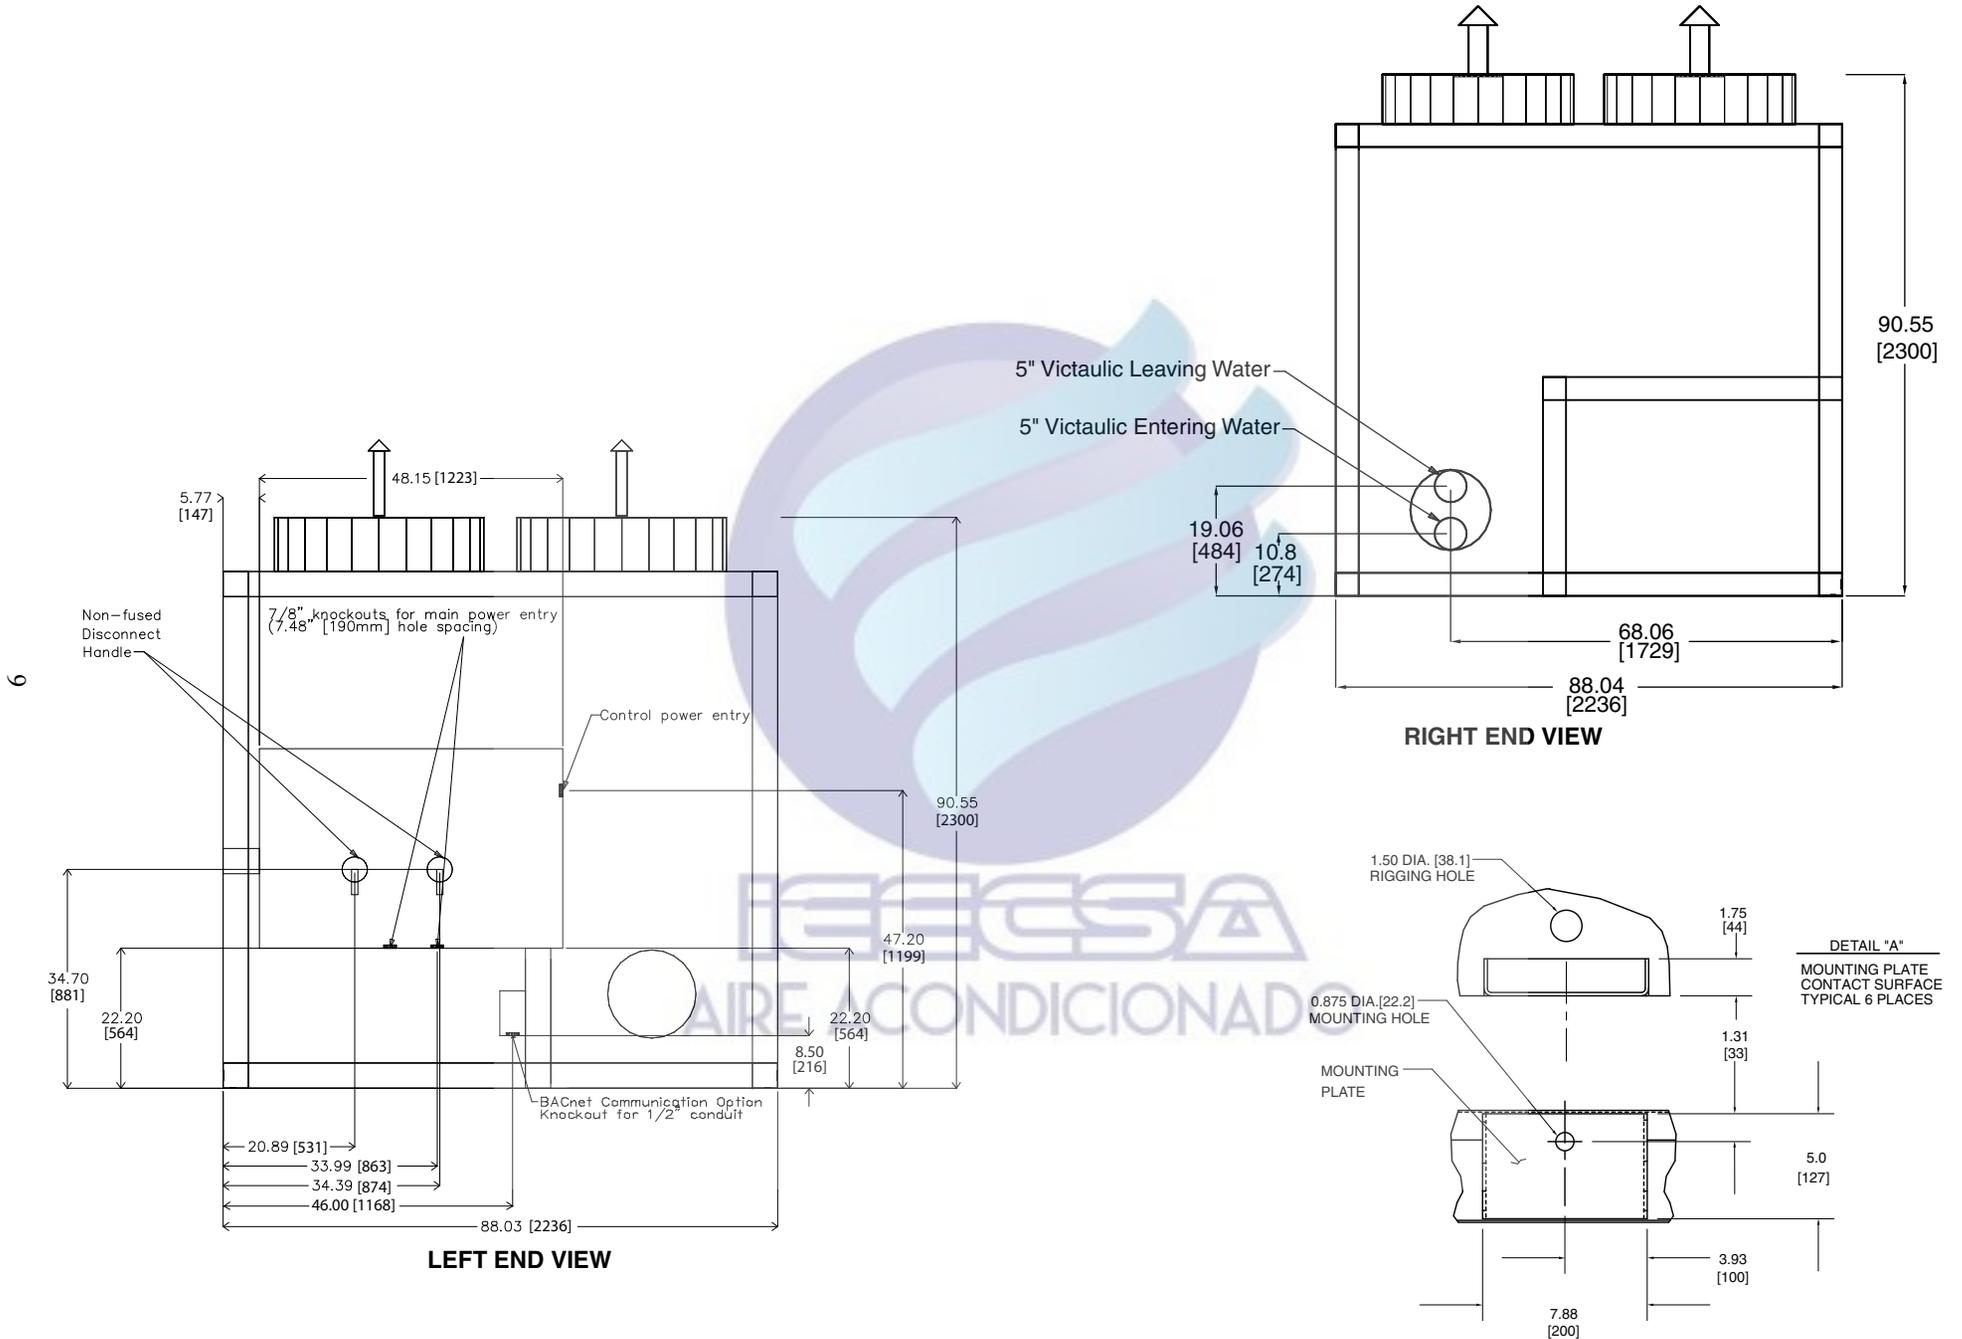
30XA090, 100, 110, 120 Air-Cooled Liquid Chiller Dimensions without Pump (cont)
